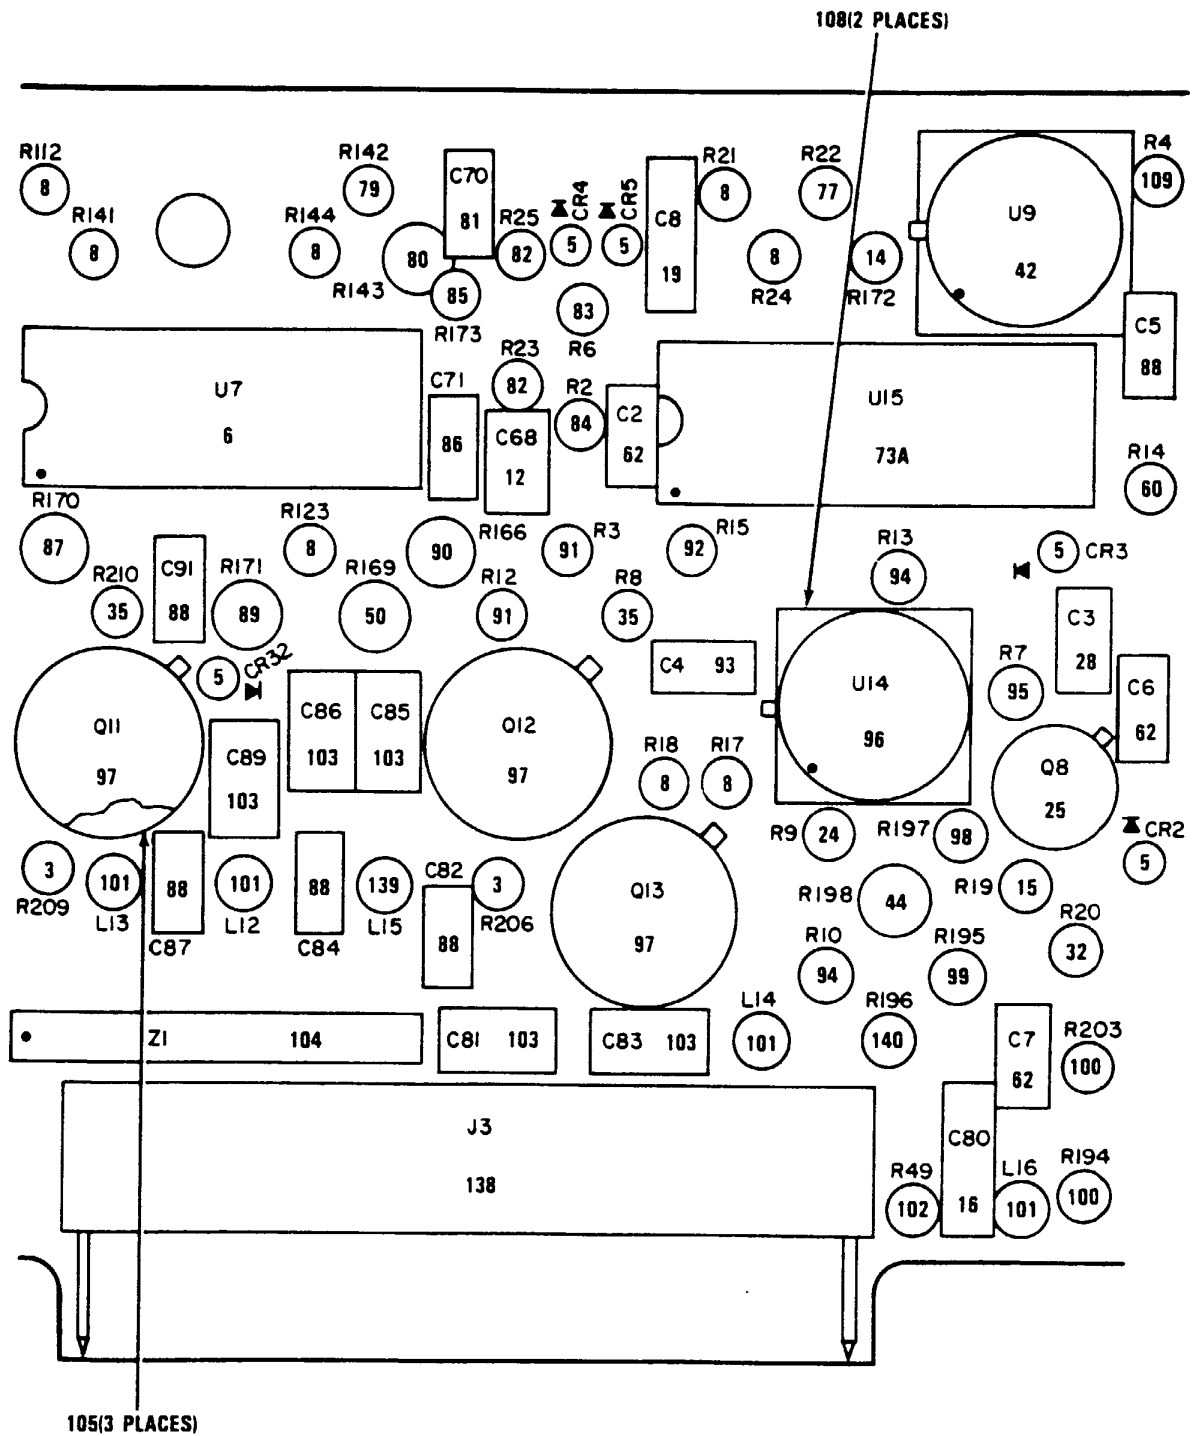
Modulator Circuit Card Assembly (Sheet 3 of 4)
